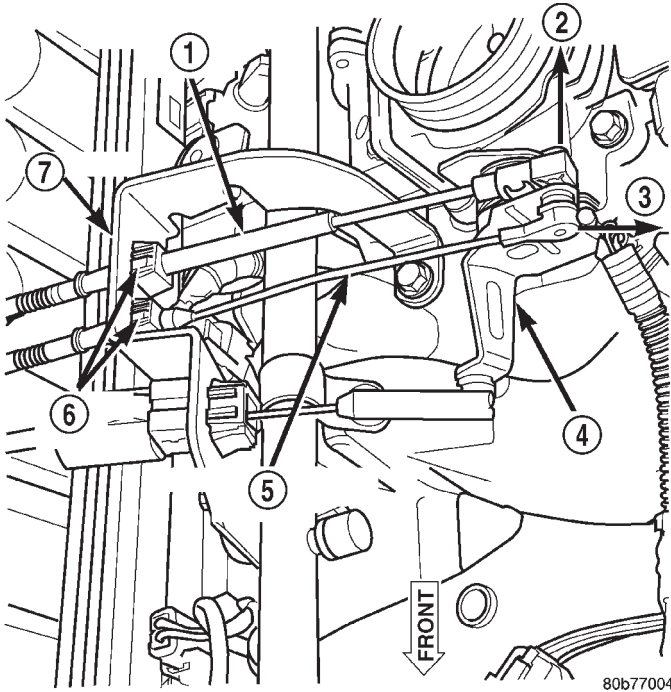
Throttle (Accelerator) Cable at Throttle Body—4.0L Engine
